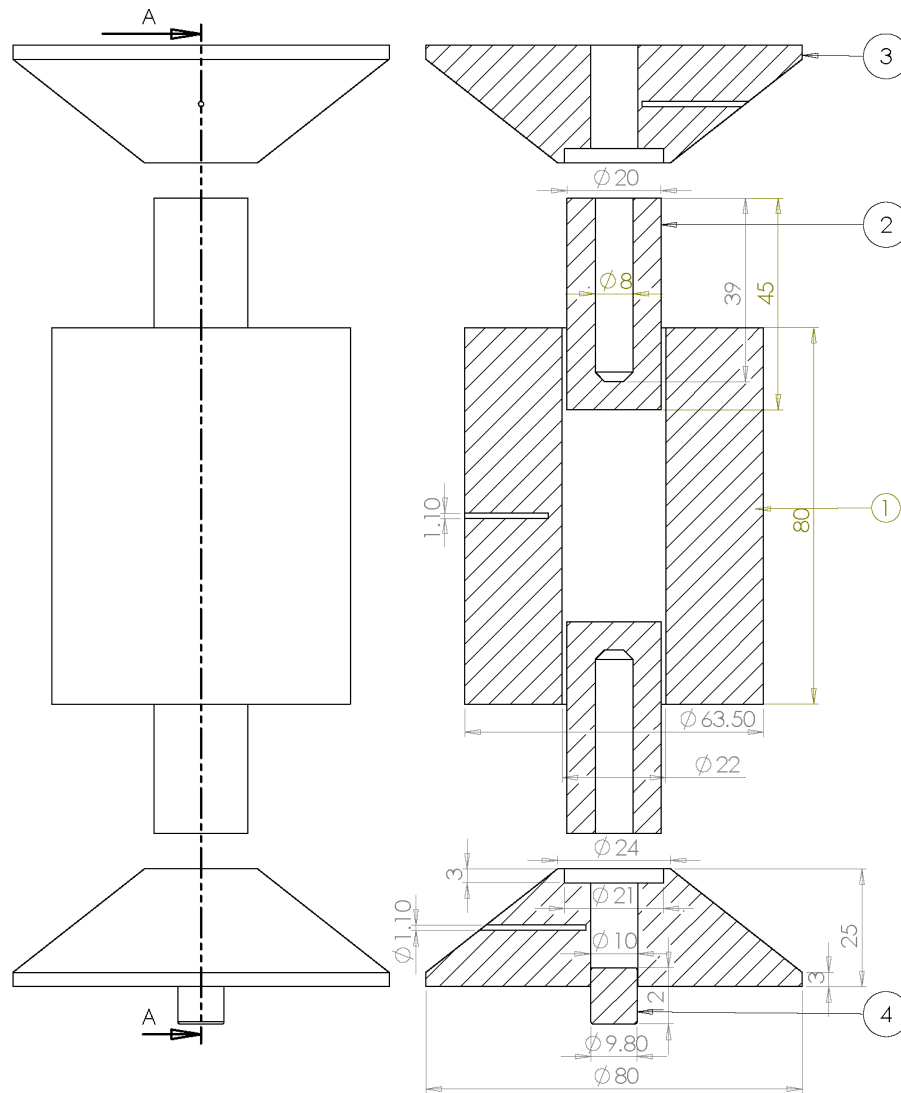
Technical drawing showing the dimensions of the components of the 20 mm diameter all-steel FAST mould assembly used in chapter 6.
